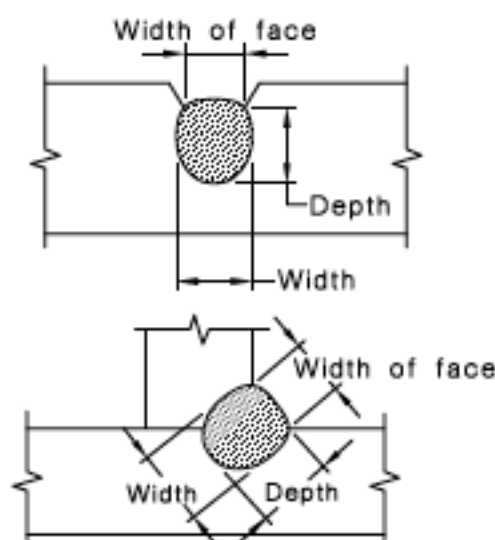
UNACCEPTABLE WELD RUN IN WHICH DEPTH AND WIDTH EXCEED THE WIDTH OF THE WELD FACE
